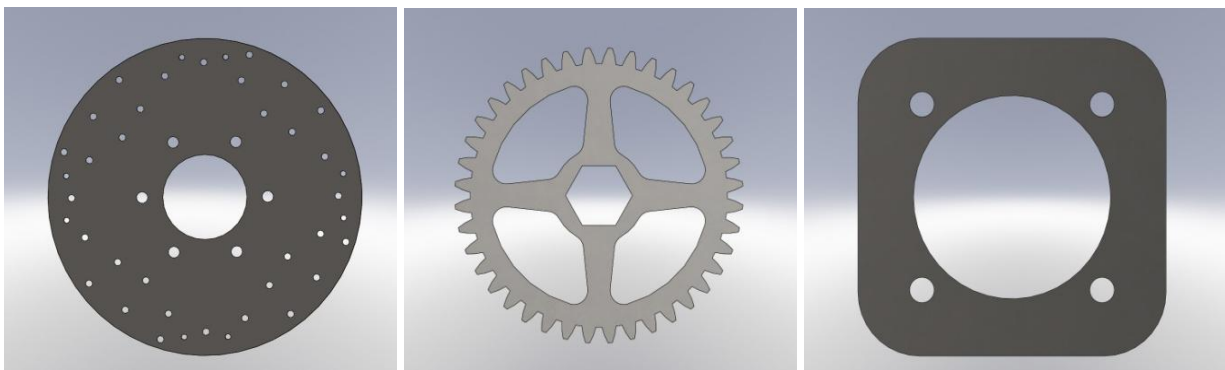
nLMD example with 1 plates (Adapter, Gear and Spacer).
